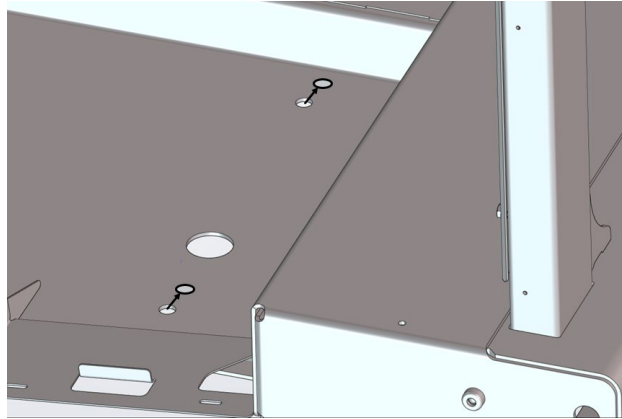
NEW HOLES FOR THE COOLING PACK MOUNTING SUPPORTS
